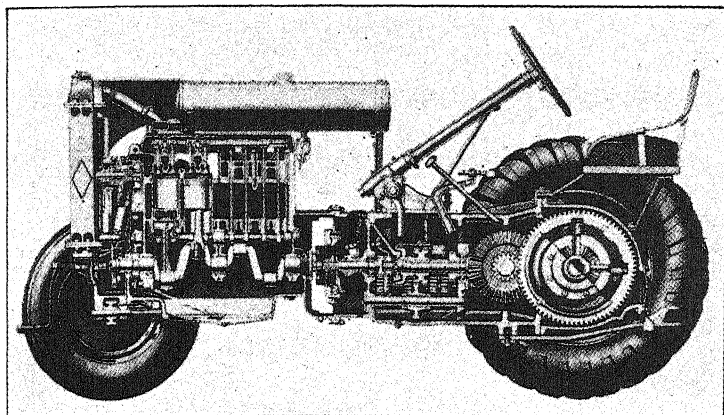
Cutaway view of standard four-wheel farm tractor.
